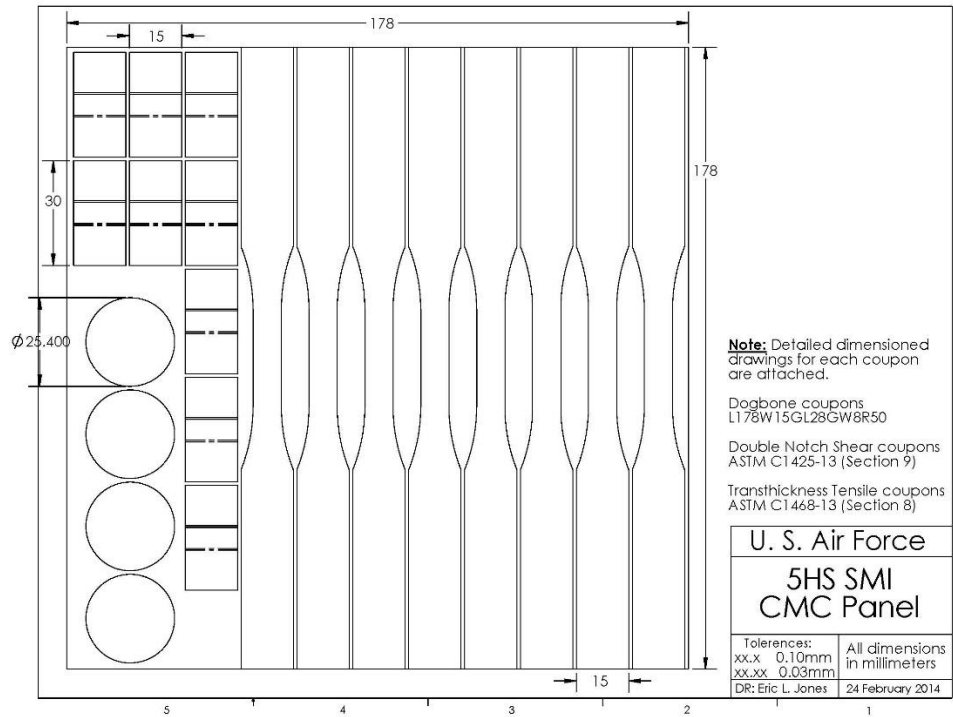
Machining Drawing For Flat Panel of SMI SiC/SiC
